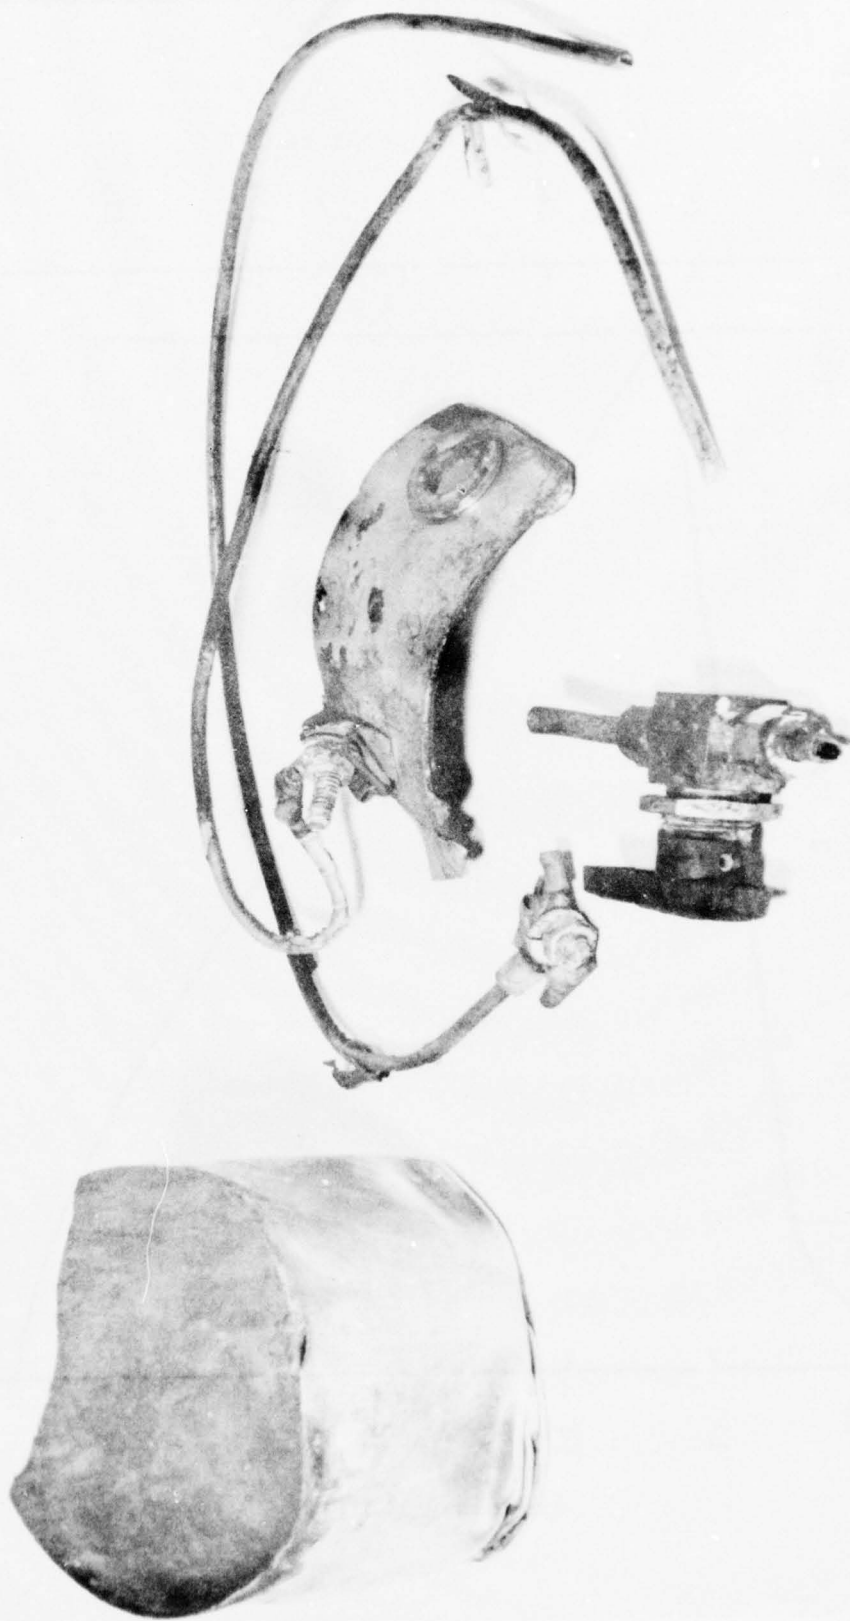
Salvaged Parts from Spacecraft "A" Battery After Explosion
